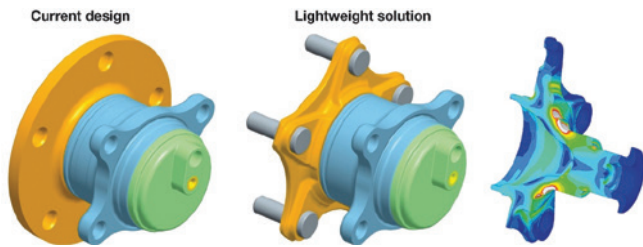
Comparison of a current wheel bearing with weight-optimized flange
